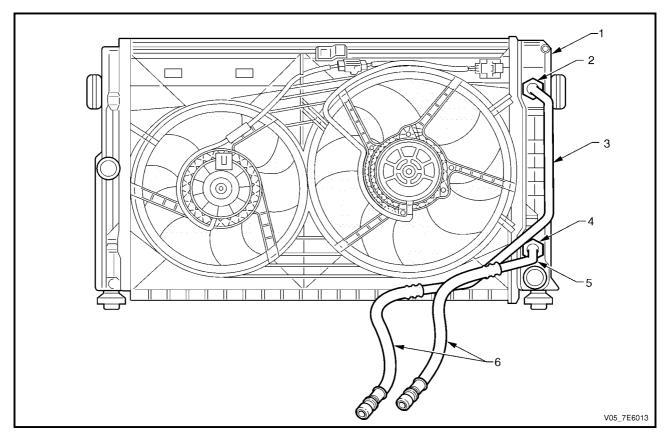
E4 - 56 - Oil Cooler Pipe/Hose Layout
